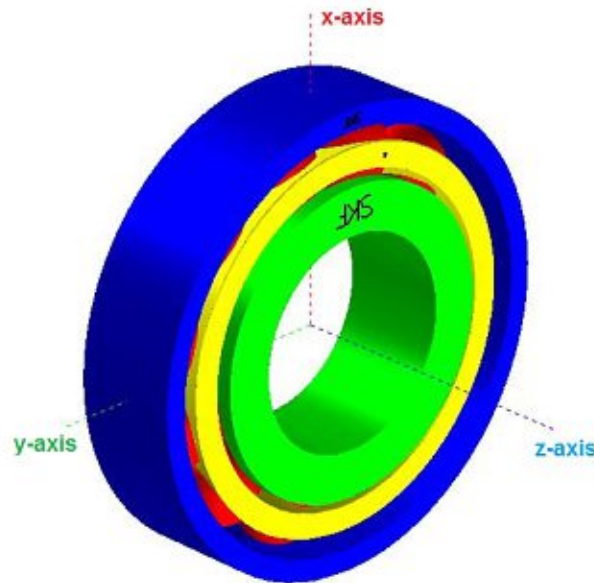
Assembled Angular Contact Ball Bearing relative to global coordinate system
